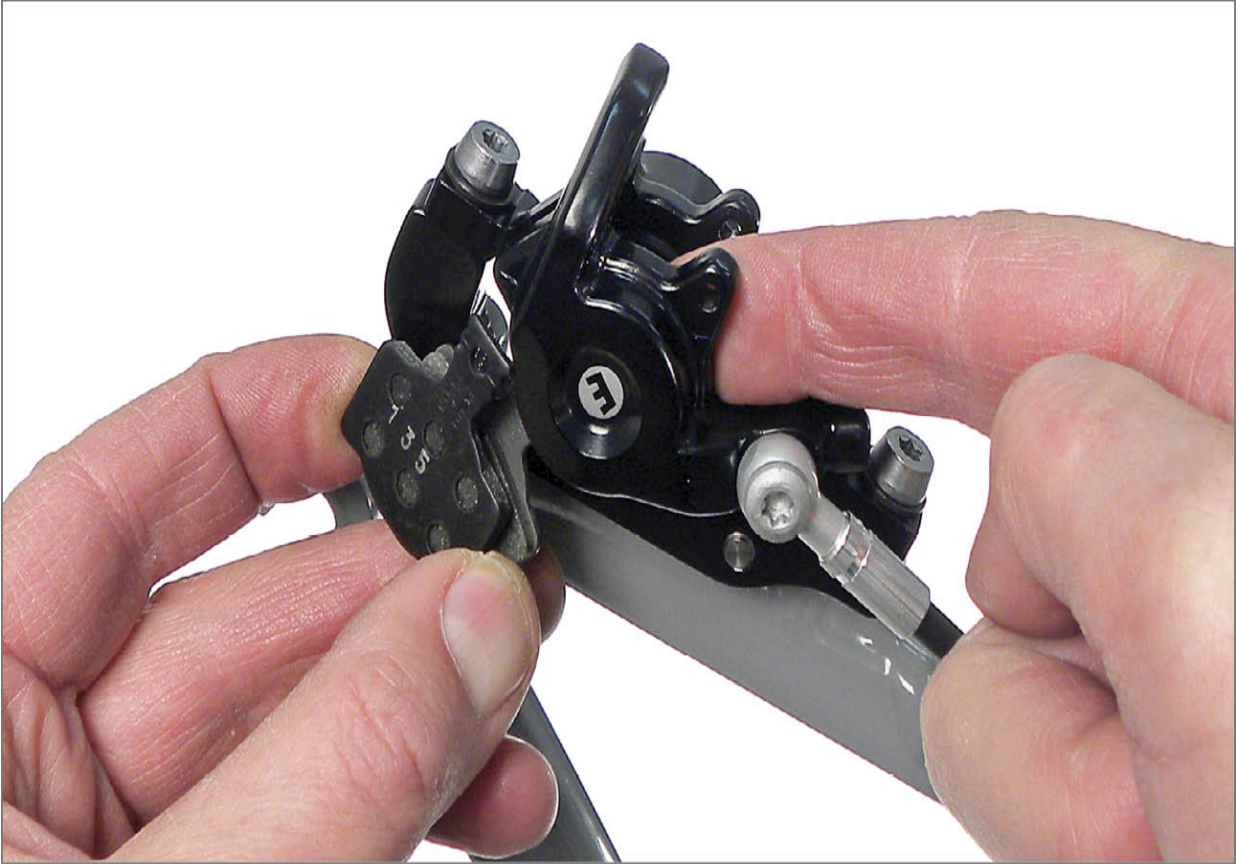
Remove magnetically held pads by pushing them out of caliper body
